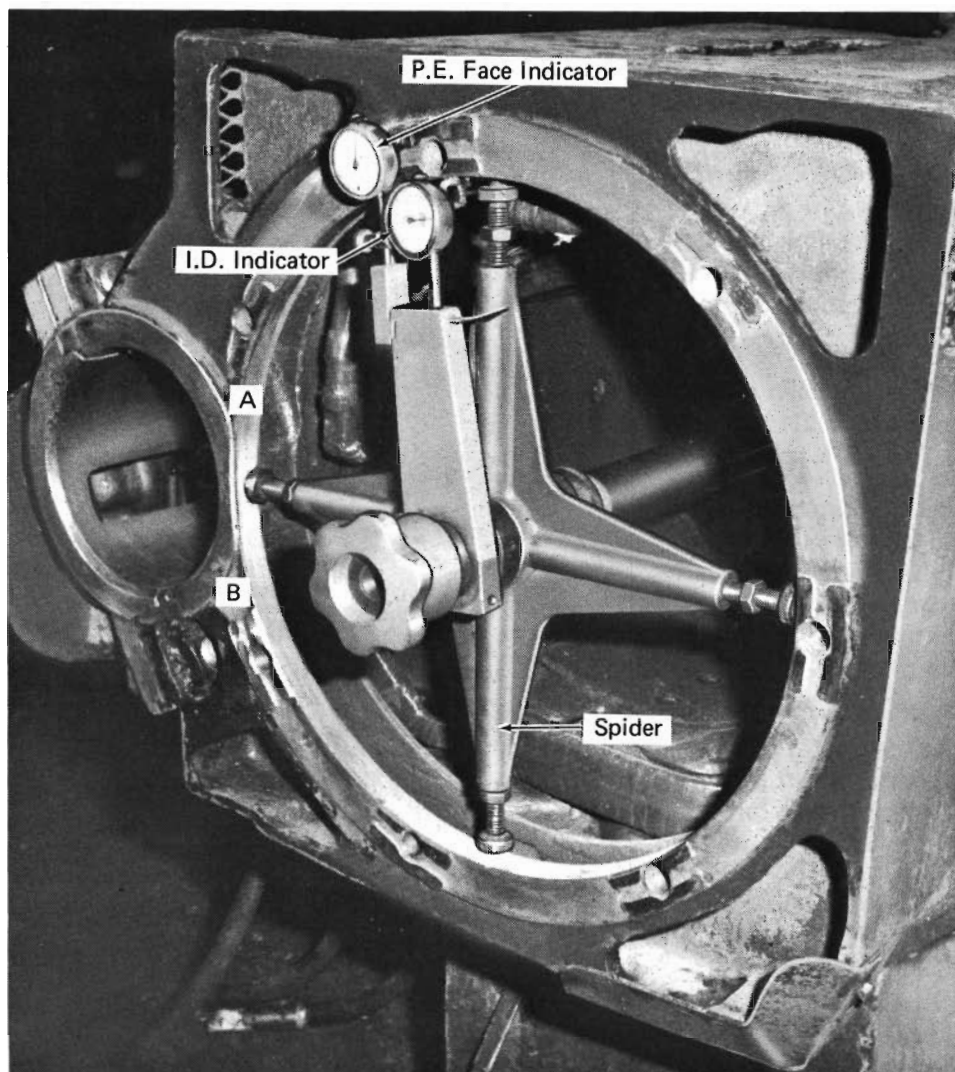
Concentricity Gauge Installed On Pinion End Frame
